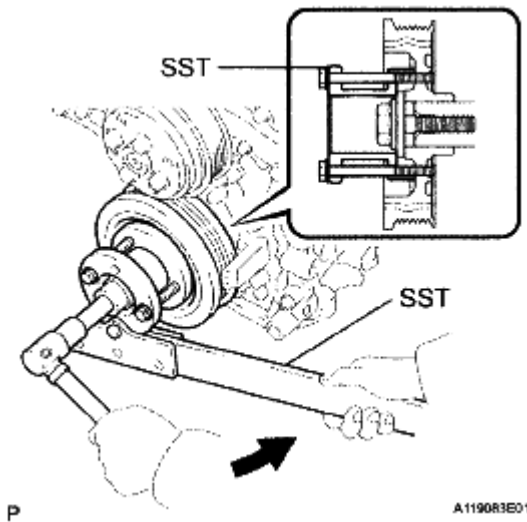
Loosening Crankshaft Pulley Bolt Using SST
